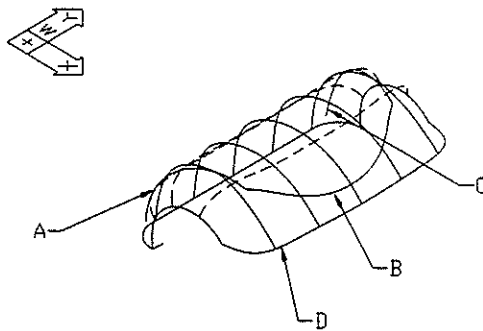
Trimmed edges copied, top and side surfaces hidden
